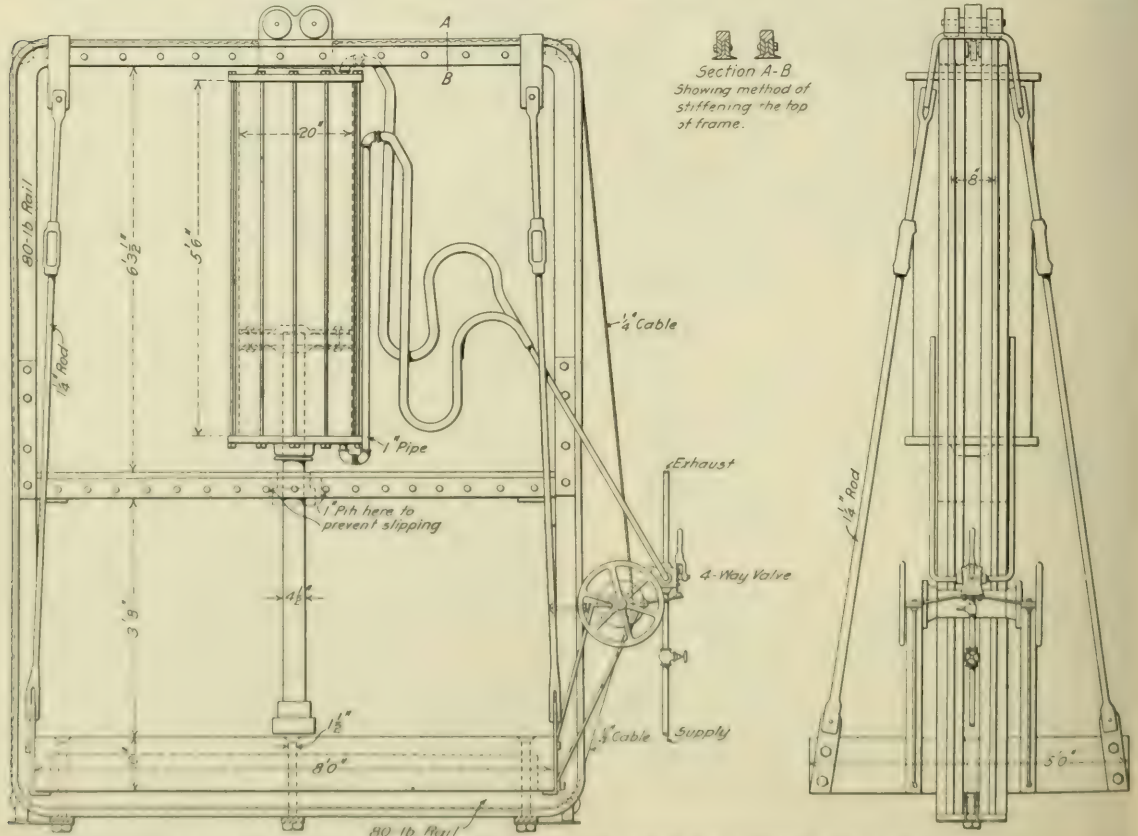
Air Press for Straightening Damaged Parts and Forming New Material.
